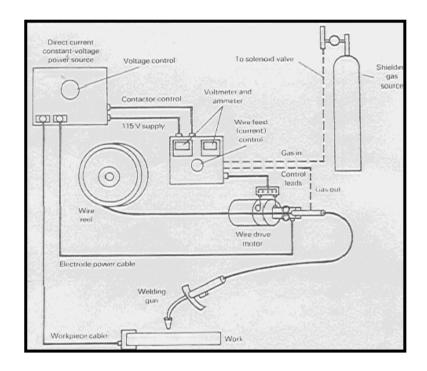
Schematic sketch of the flux-cored arc welding process
